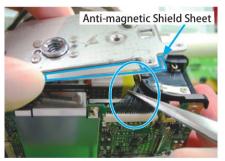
Auto Focus FPC Ass'y Assembly 5
